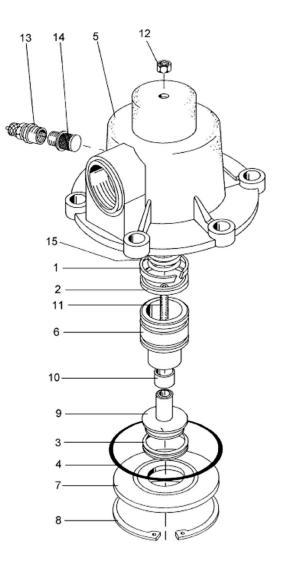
MINIMUM DISCHARGE PRESSURE/CHECK VALVE
